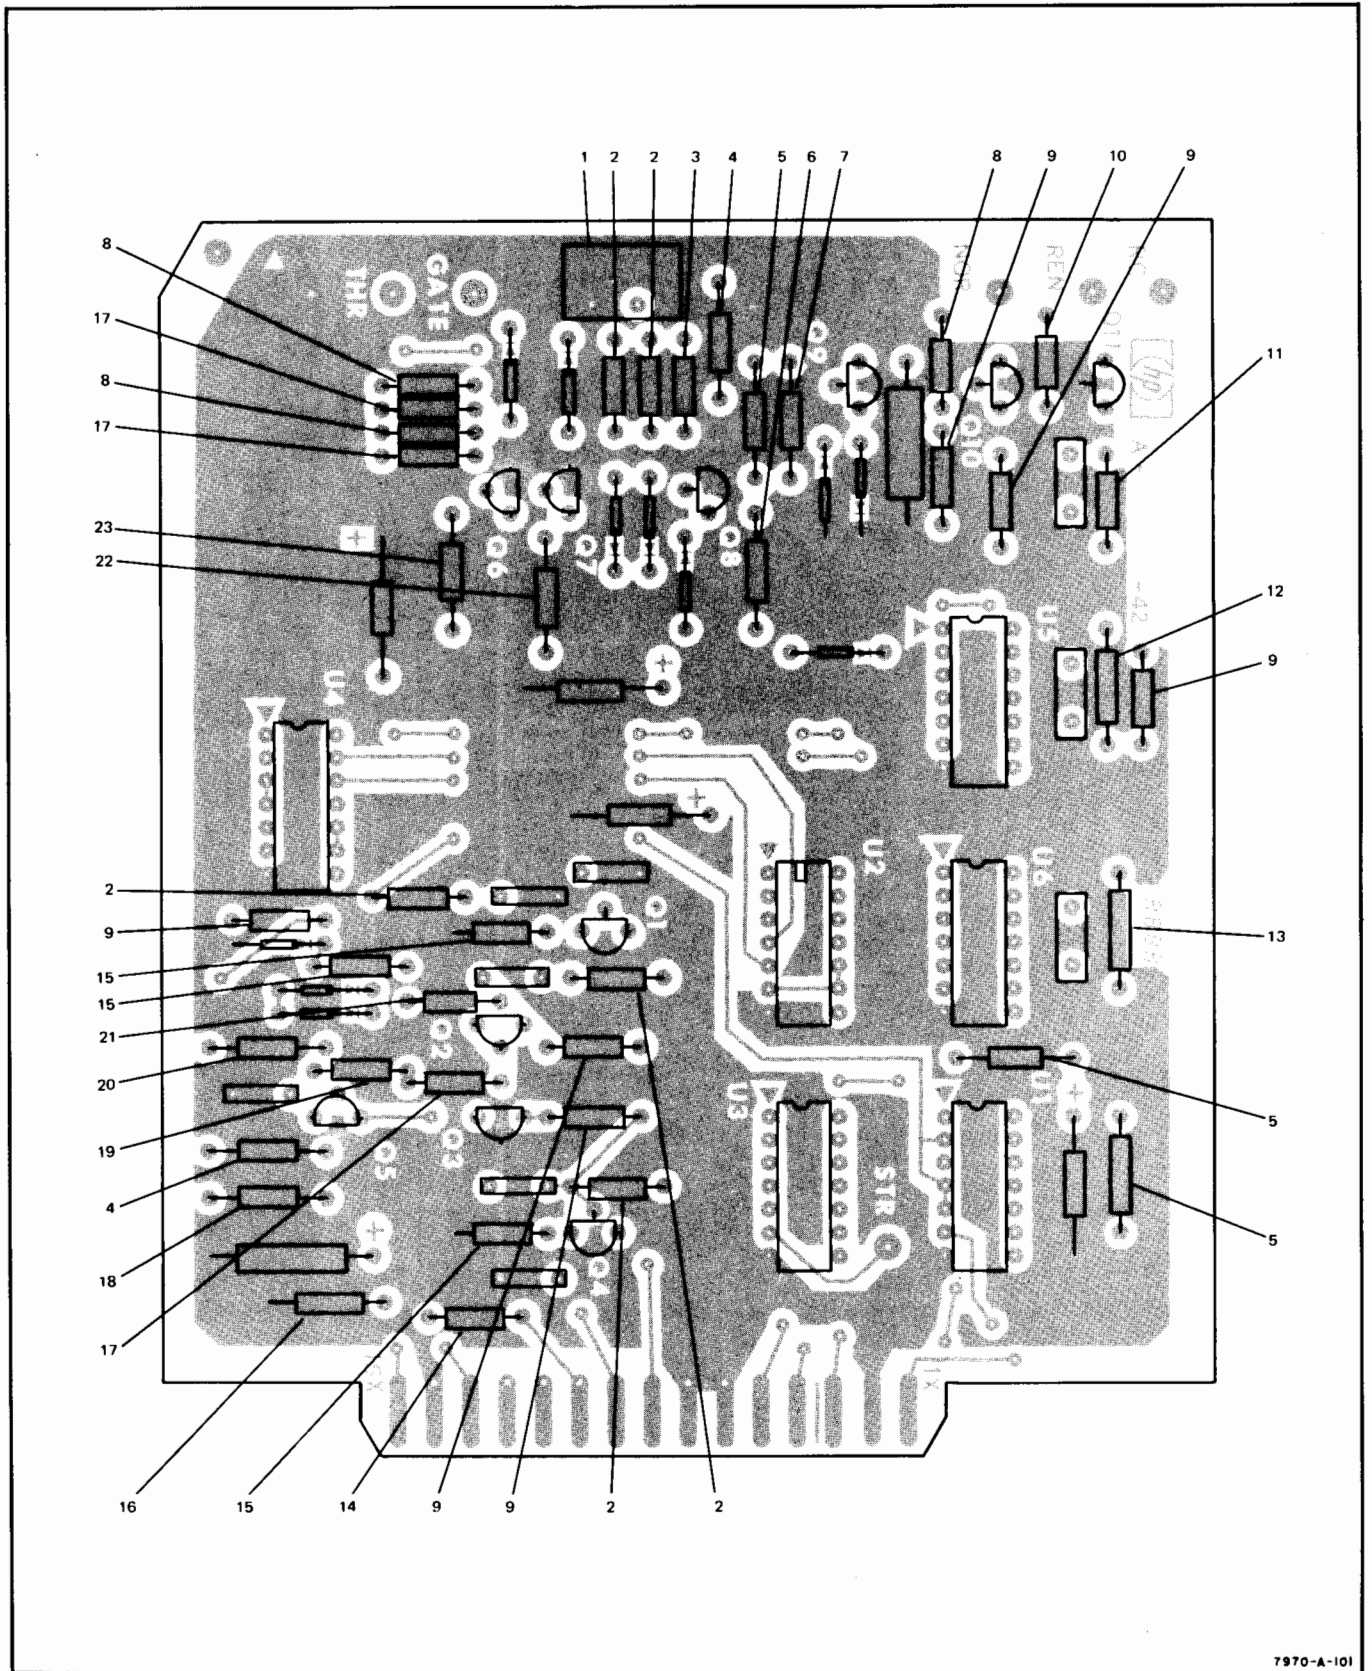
Read/Read Control PC Assembly A18A1 (Sheet 1 of 2)
